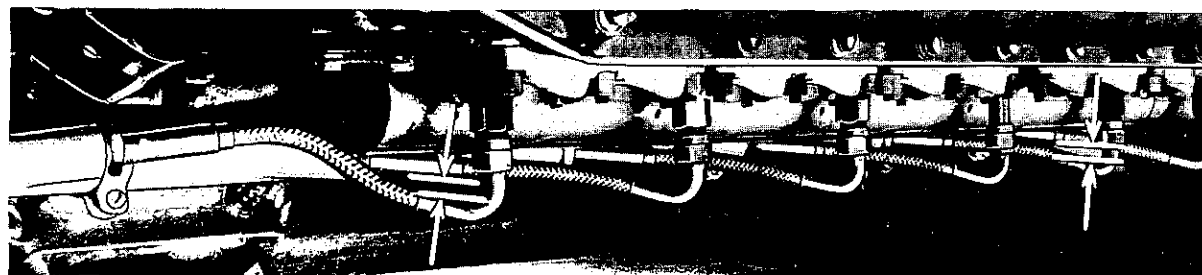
Distributor Drives and Ignition Shielding Assembled Unit. (Type without gun synchronizer drives.)
